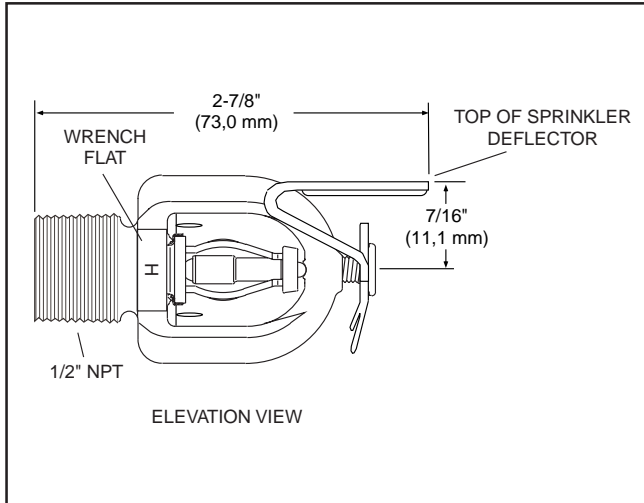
Cross Section Model H, Horizontal Sidewall Sprinkler
